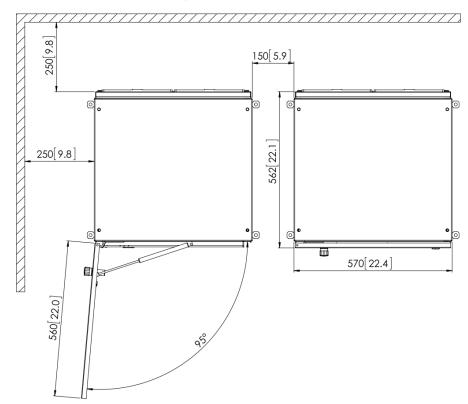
Foot Print & Spacing, Fixed Unit
